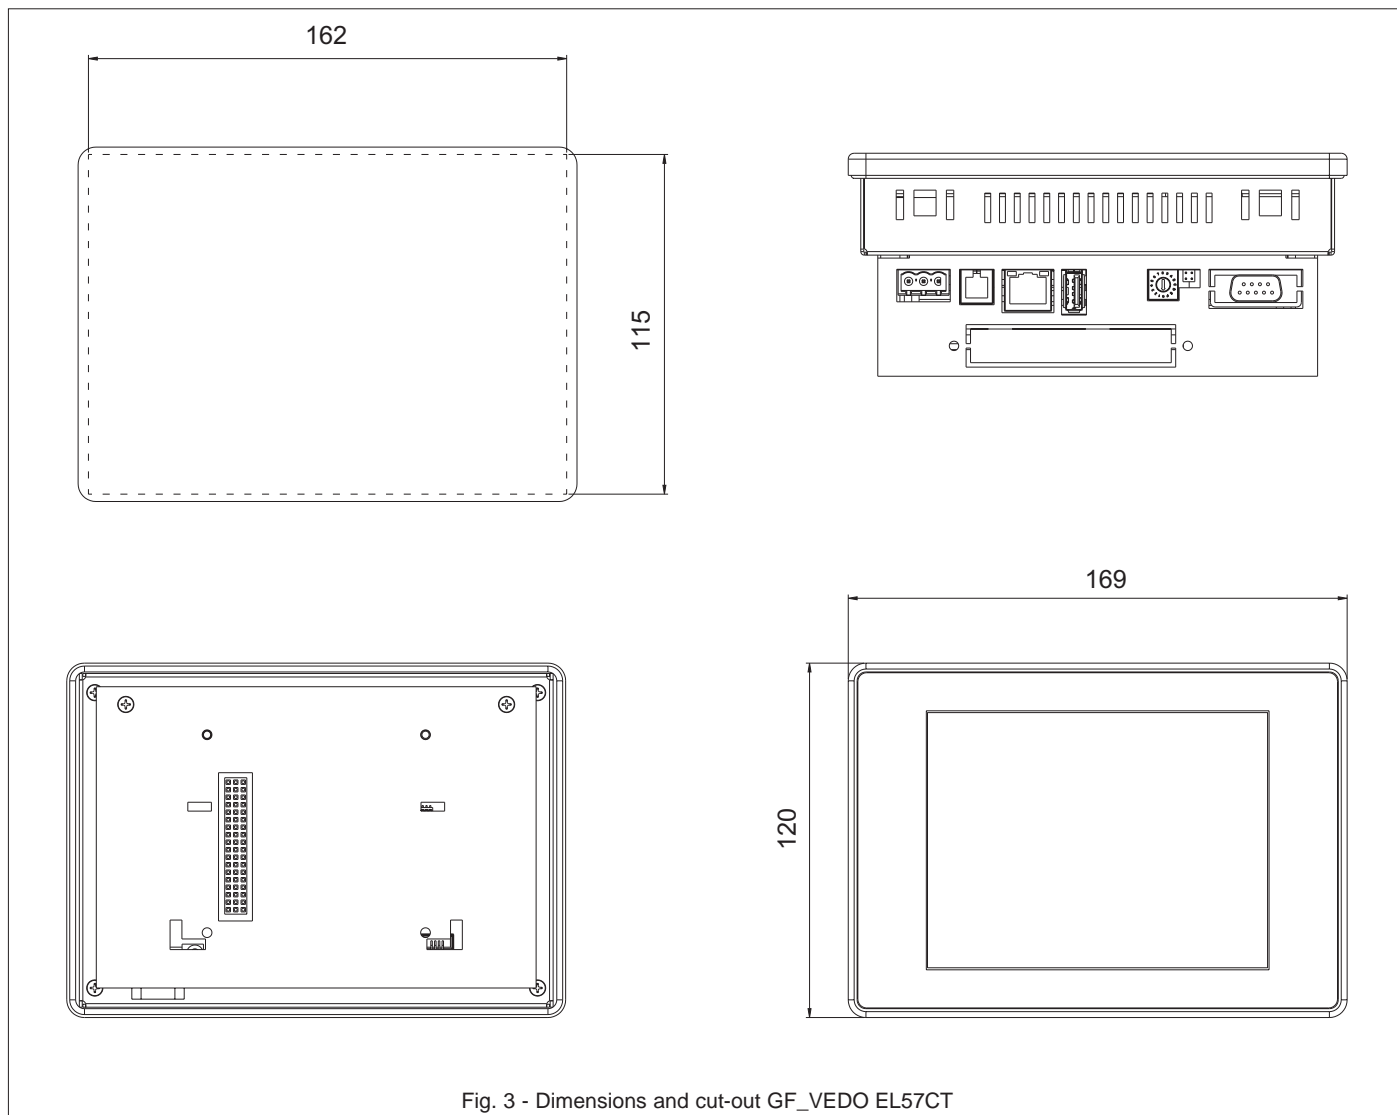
Dimensions and cut-out GF_VEDO EL57CT
